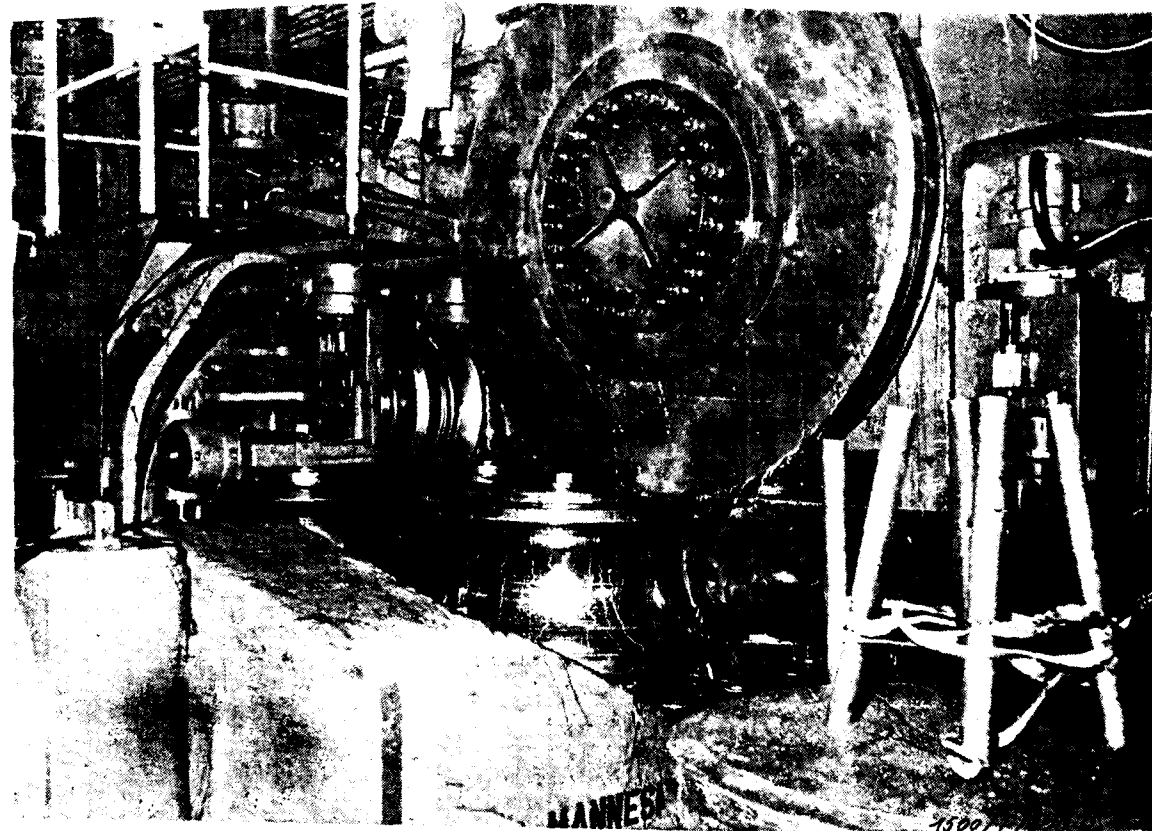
The tube welding table. (Photo: Mannesmann-Meer AG)
